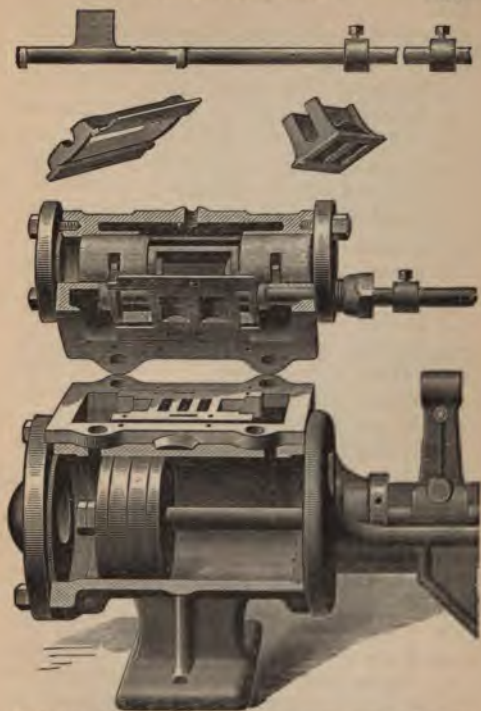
DETAILS OF STEAM END, DEANE PUMP.
